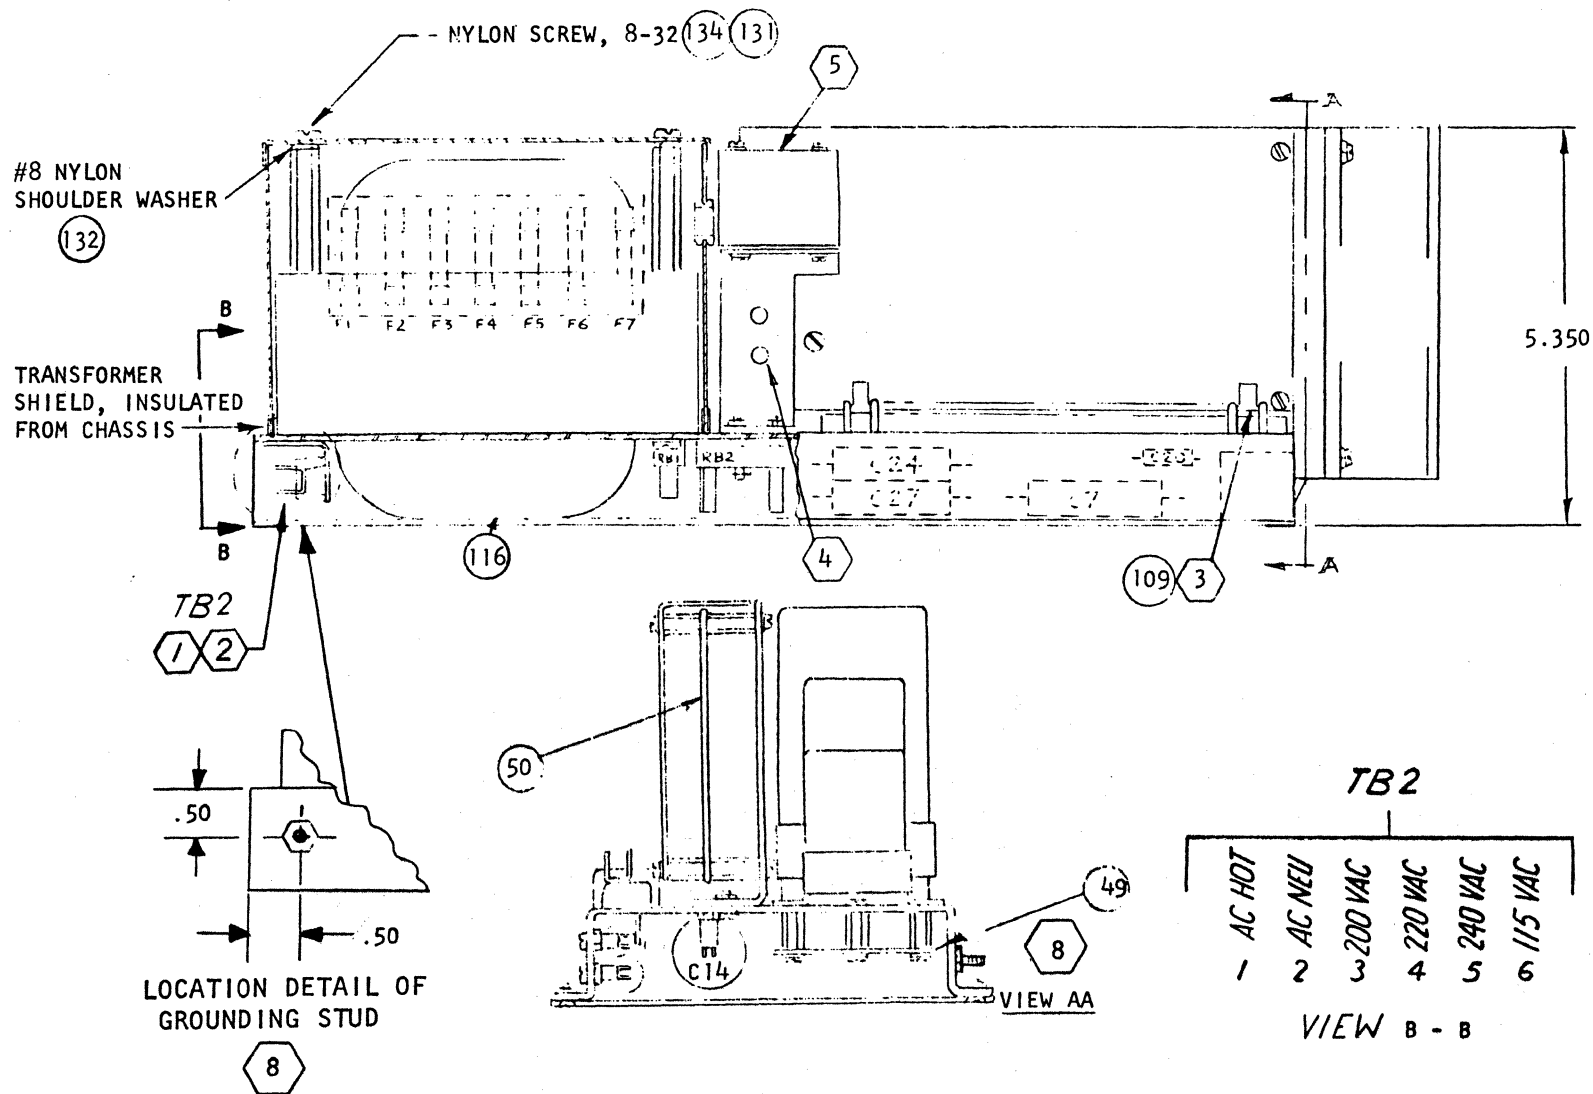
OUTLINE, SIDE VIEW (SHEET 2 OF 6)
